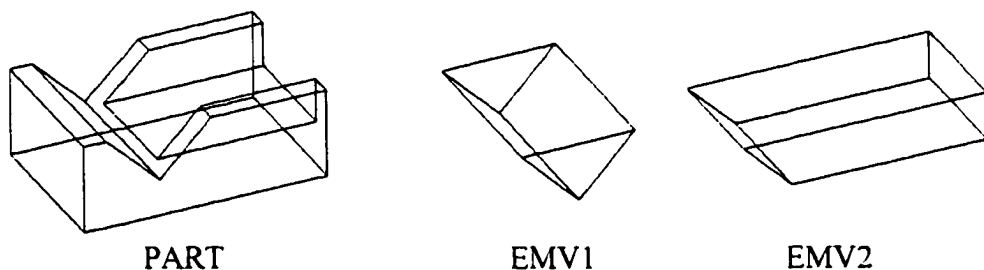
Example of unmachinable EMV: EMV2 is unmachinable.
